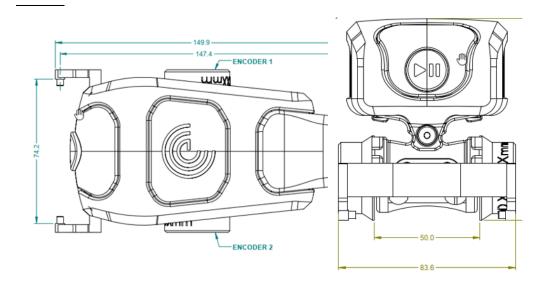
PaintBrush 2 Size. All dimensions in millimeters
